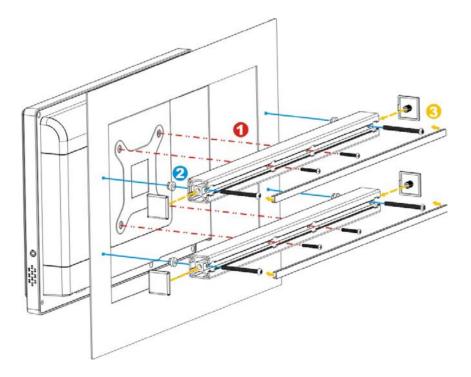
Tighten the Panel Mounting Clamp Screws
